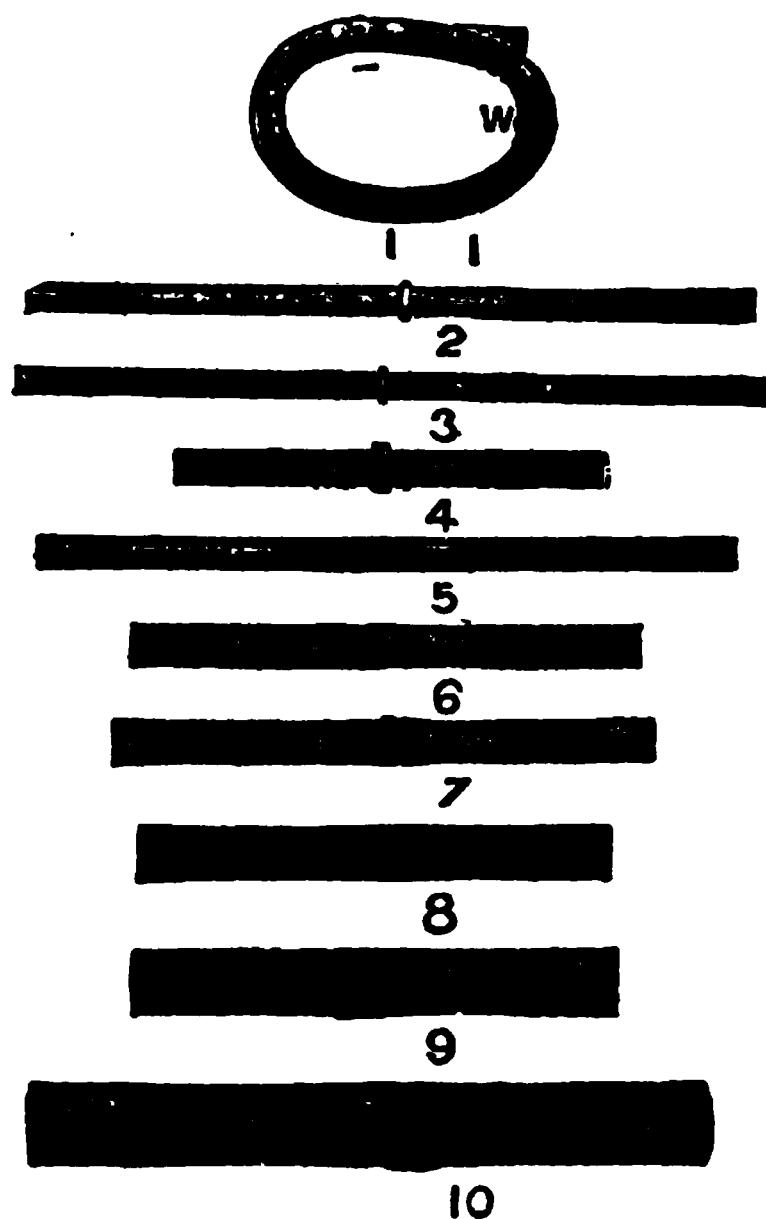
Some Specimens of Electrically Welded Tubes.
